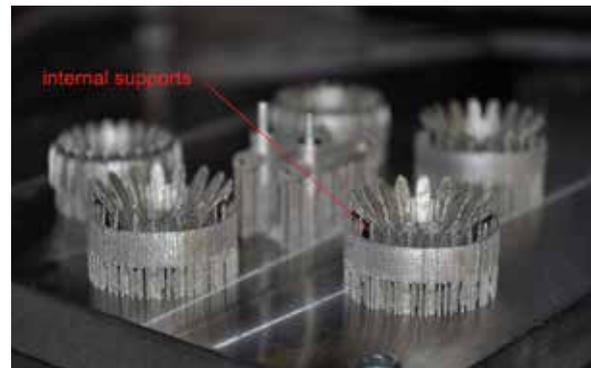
Test pieces on base plate with additional internal supports, 2013.
